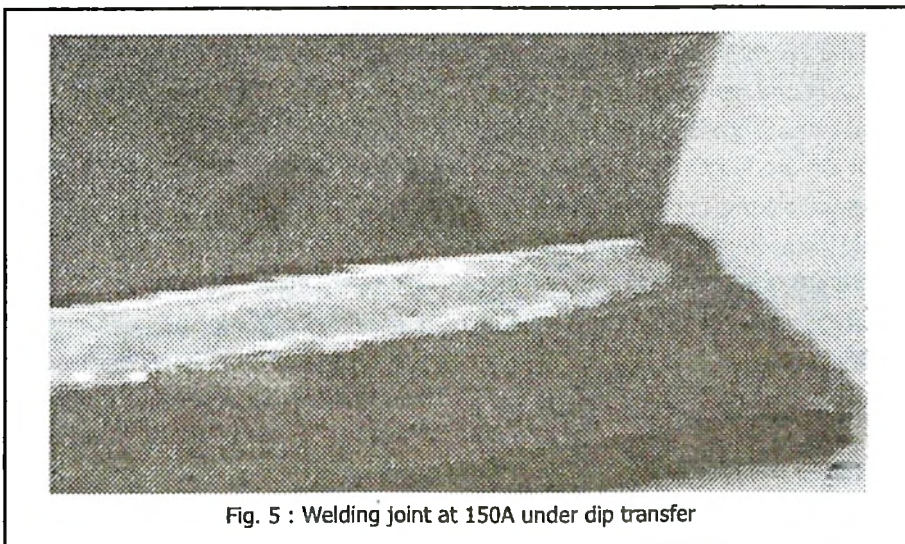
Welding joint at 150A under dip transfer
